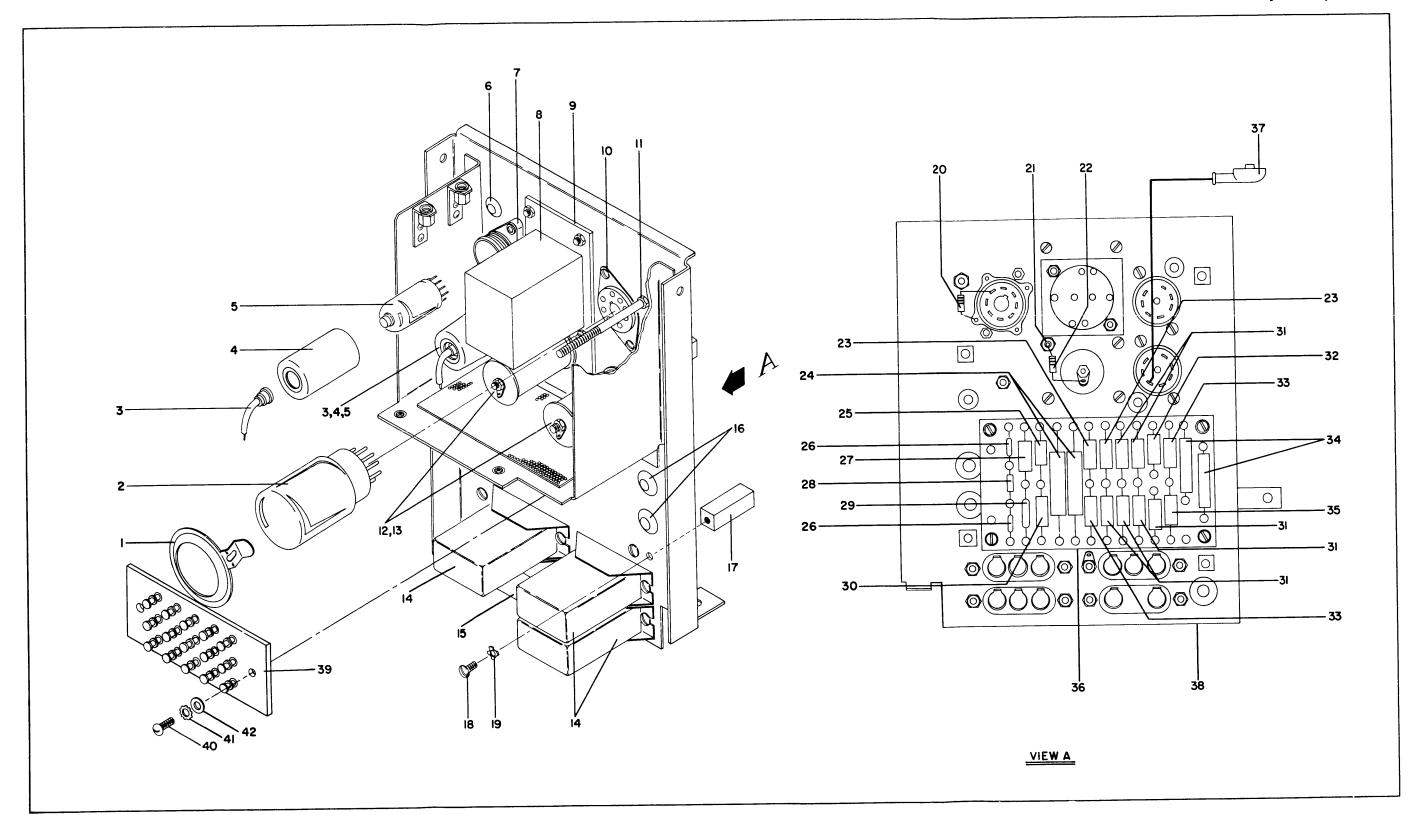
CRT Power Supply Chassis Assembly, Exploded View
